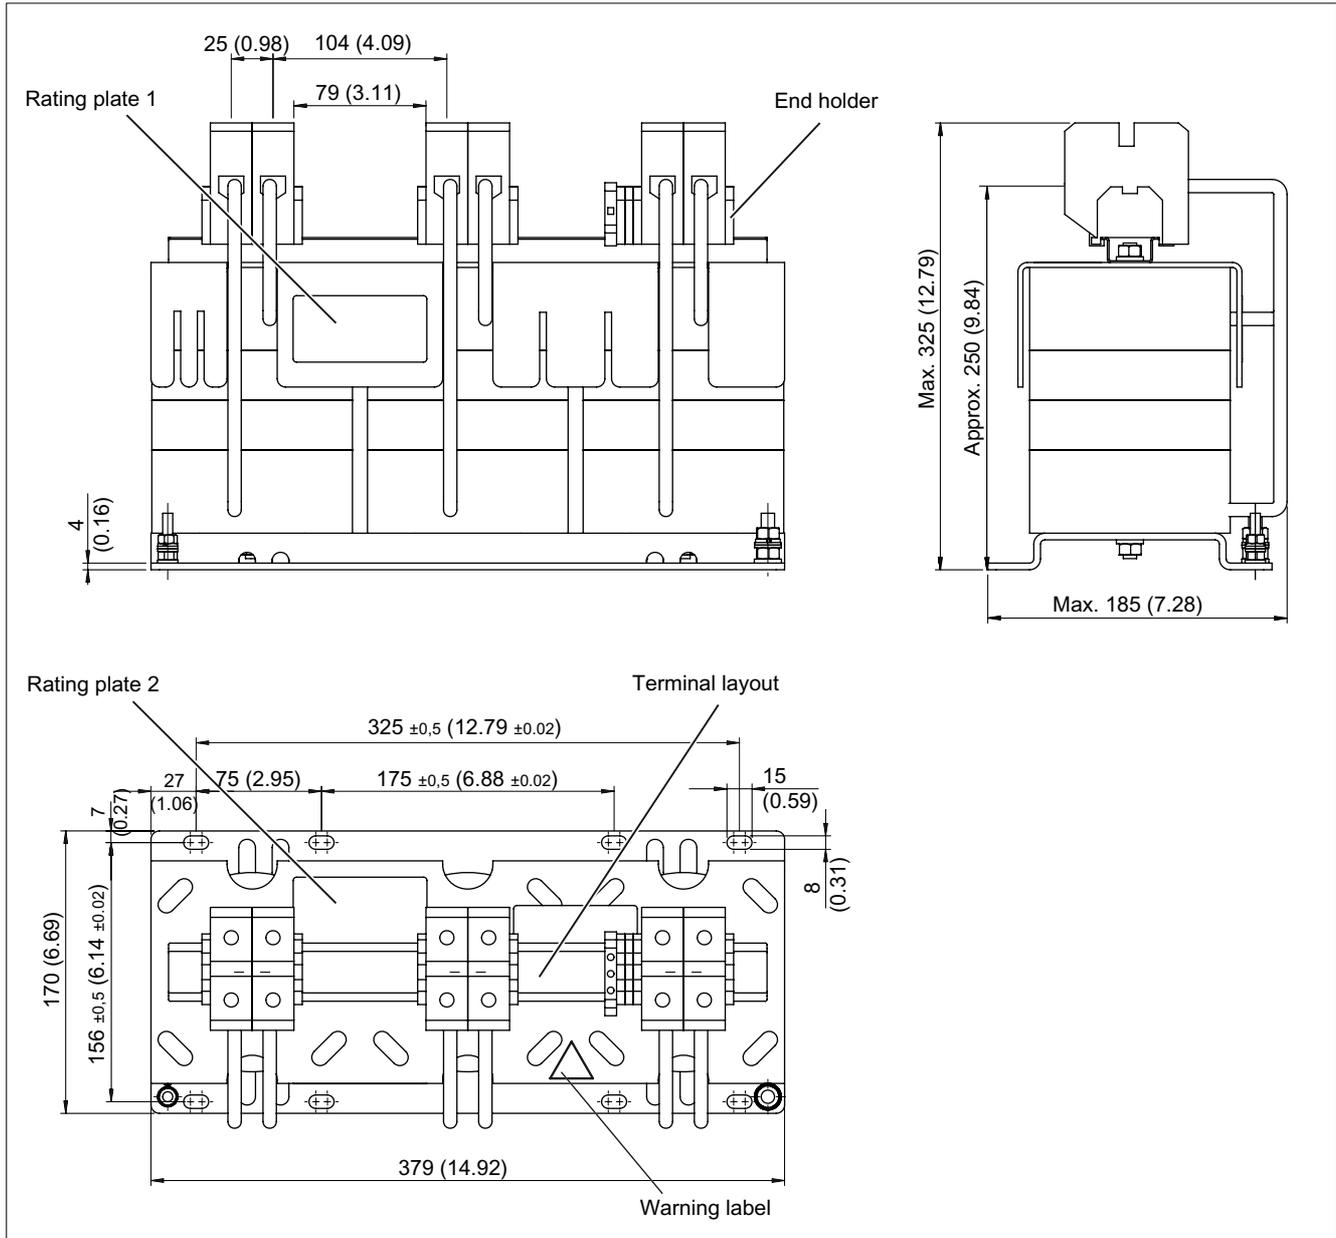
Dimension drawing of HFD line reactor 80 kW, all dimensions in mm and (inches)
